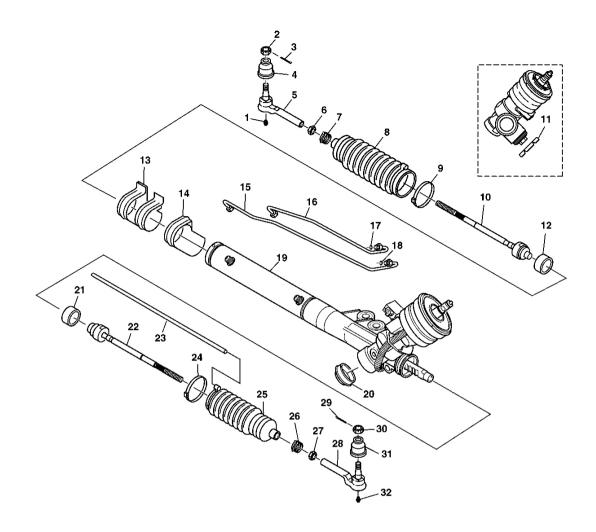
Magnasteer Power Steering Gear Component View Courtesy of GENERAL MOTORS CORP.
